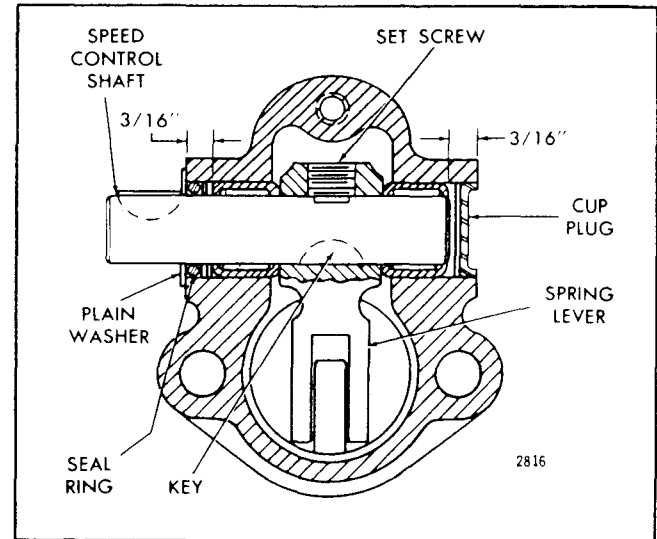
Cross Section of Governor Spring Housing and Lever Assembly
